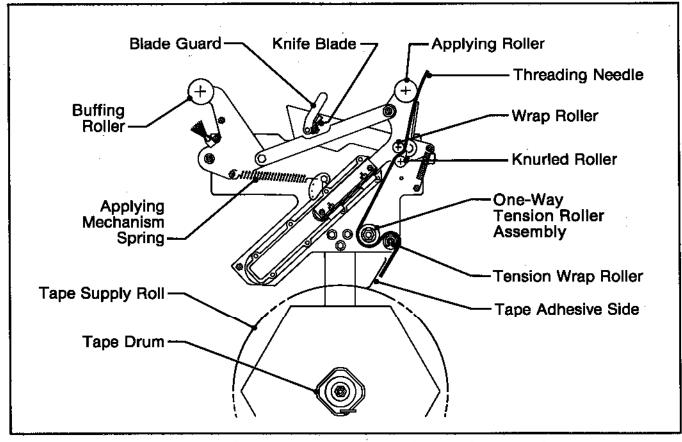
A - Tape Threading Diagram - Right Hand Taping Head - Top View
